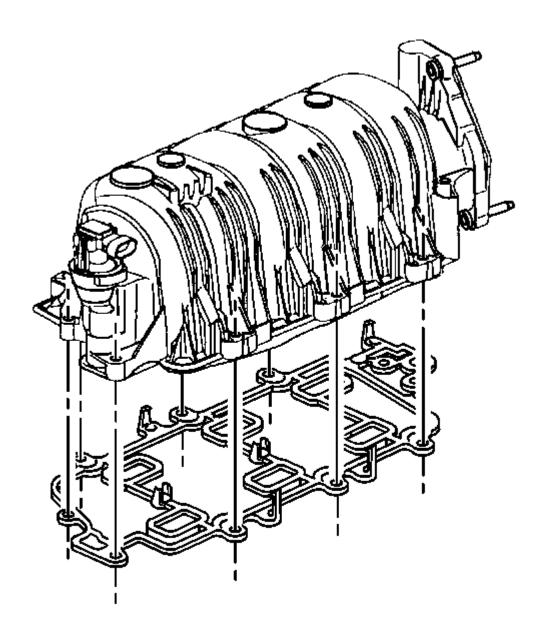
Upper-To-Lower Intake Manifold Carrier Gasket Courtesy of GENERAL MOTORS CORP.
